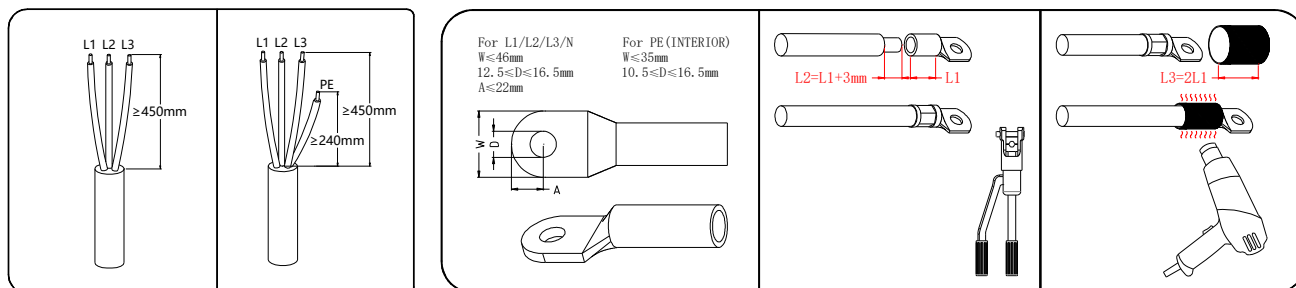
Peel off the cable insulation sheath and core wire insulation layer FIG 5-9 Process the cable cores
